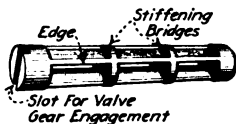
Corliiss admission valve of the "Ideal" Corliiss-valve engine.
